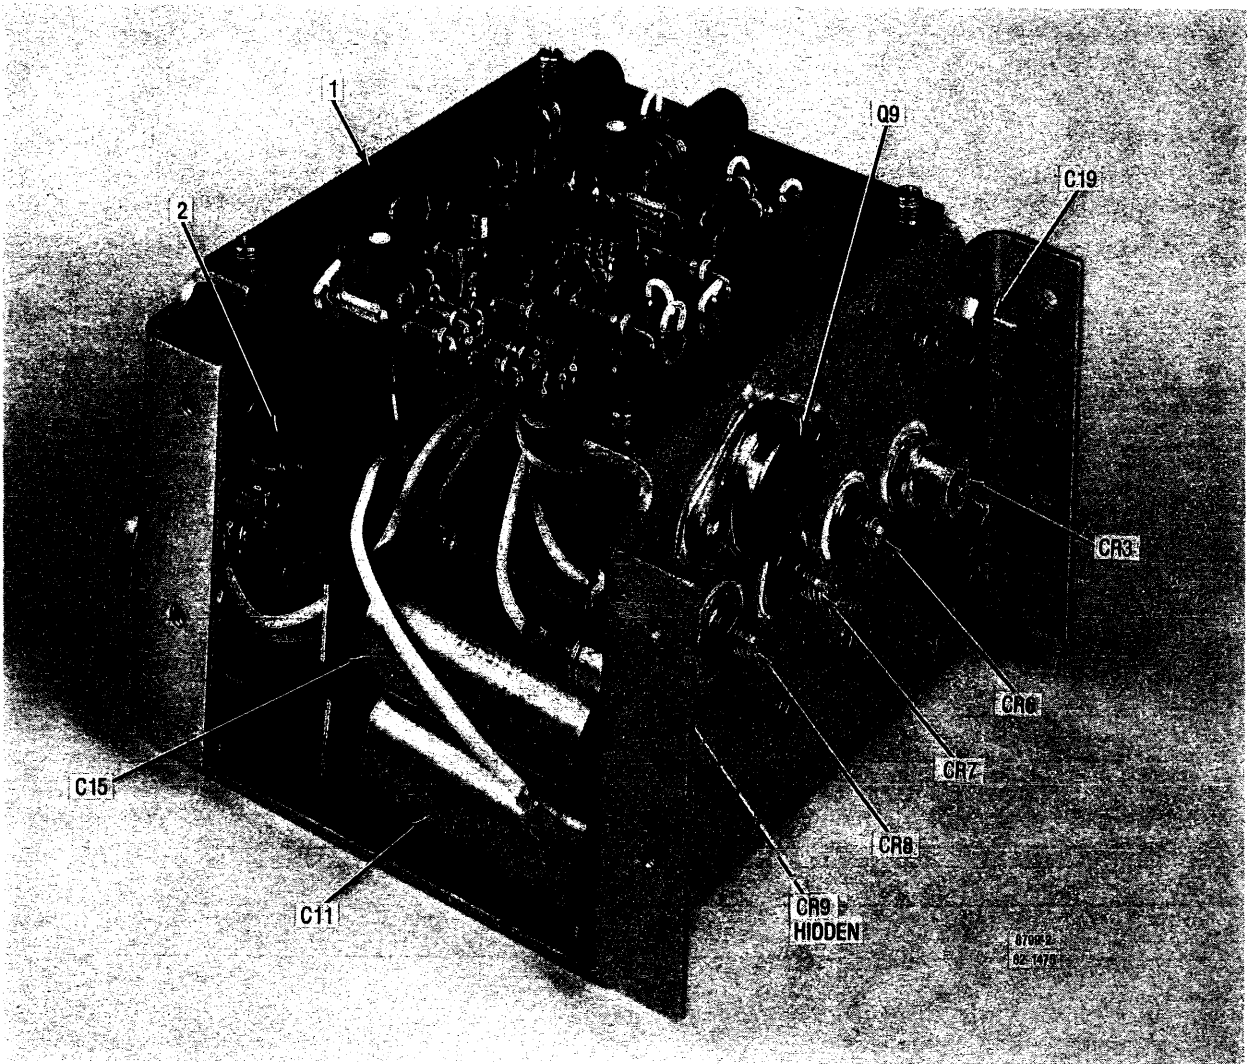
C. Converter Control Assembly Parts Location Diagram
